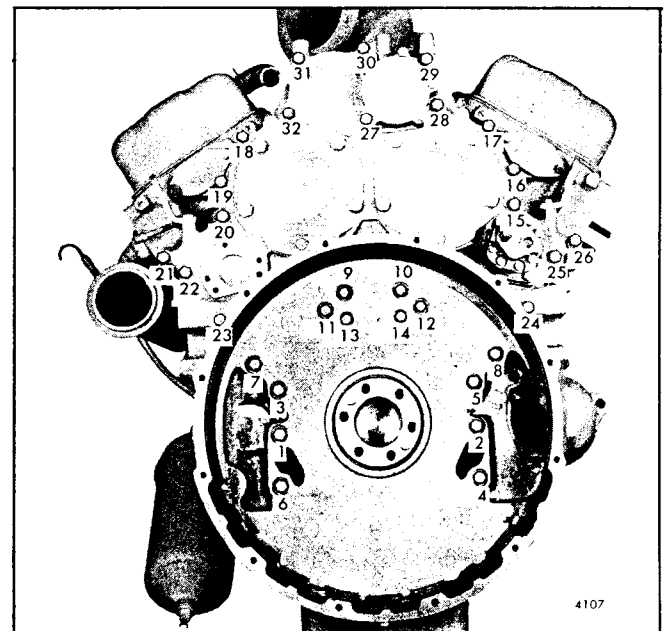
Flywheel Housing Bolt Tightening Sequence (Operation 2)--8V Engine
